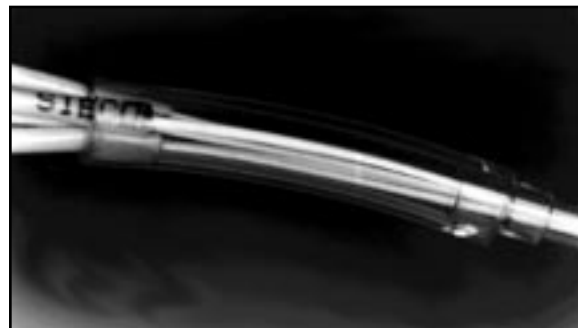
INSERTING PIGTAILS INTO PIGTAIL TUBE ASSEMBLY
